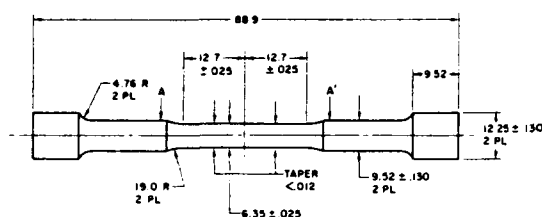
Dimensions of a round tensile sample (in millimeters).
